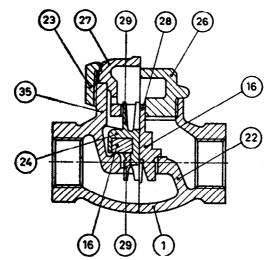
Horizontal Pattern Lift Type Disk Check Valve
